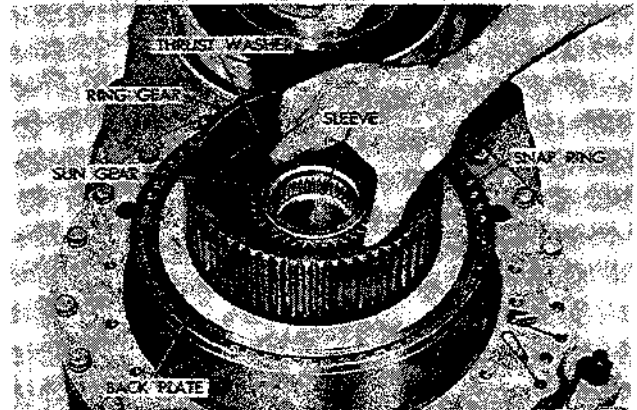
INSTALLING HIGH-RANGE SUN GEAR
